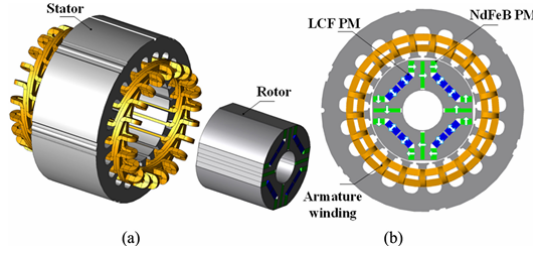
Considered HMC-VFMM. (a) Three-dimensional exploded view. (b) Cross-sectional view.
